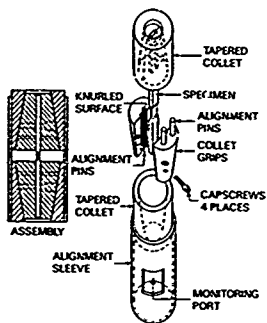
ASTH D-3410(Celane) Compression Test Fixture Using Conical Wedges
